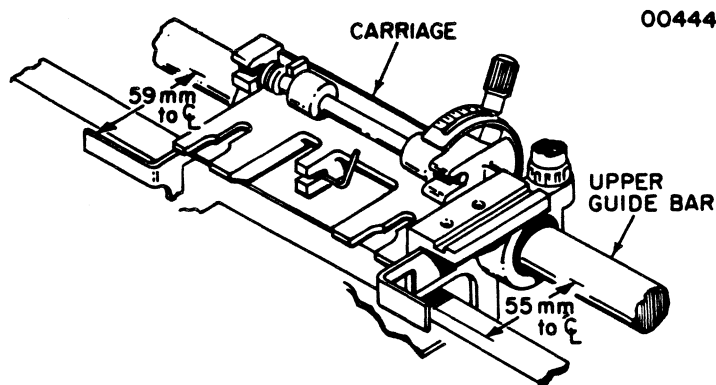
CARRIAGE ACTUATOR ARMS ADJUSTMENT
